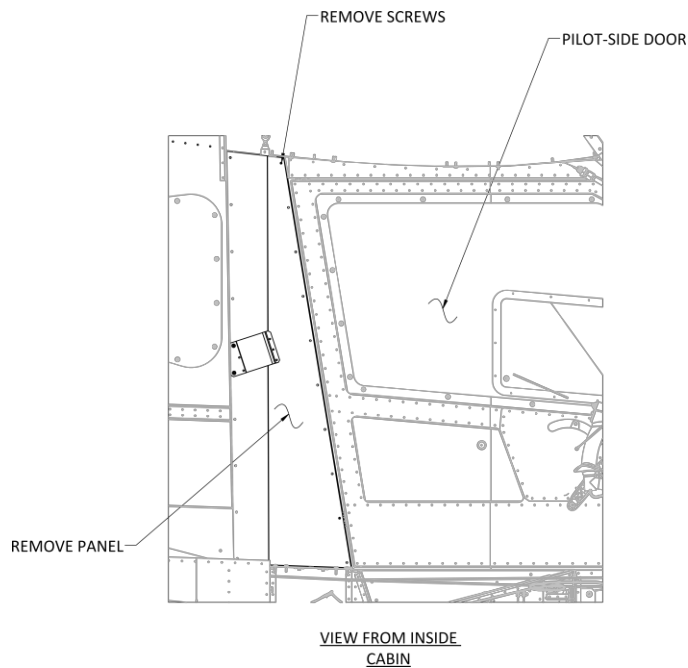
Aileron pushrod access panel located inside the cabin.
